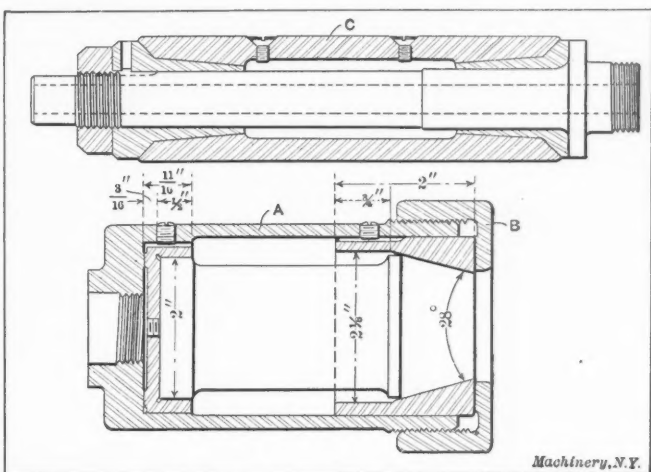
Holder and Quill for Grinding Hartford and Pratt &amp; Whitney Collets
